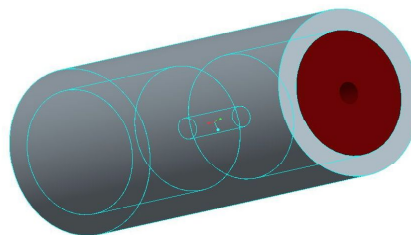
Wire straightening inspection unit orthographic representation
